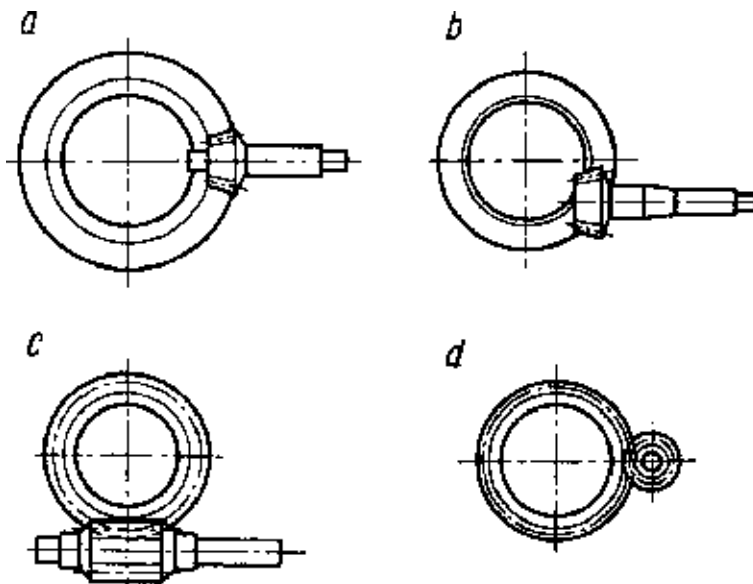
The typical, one-stage final drives produced by the automotive industry: (a) spiral bevel gears (offset = 0), (b) hypoid gears (offset > 0), (c) worm gears, and (d) helical gears [2].
